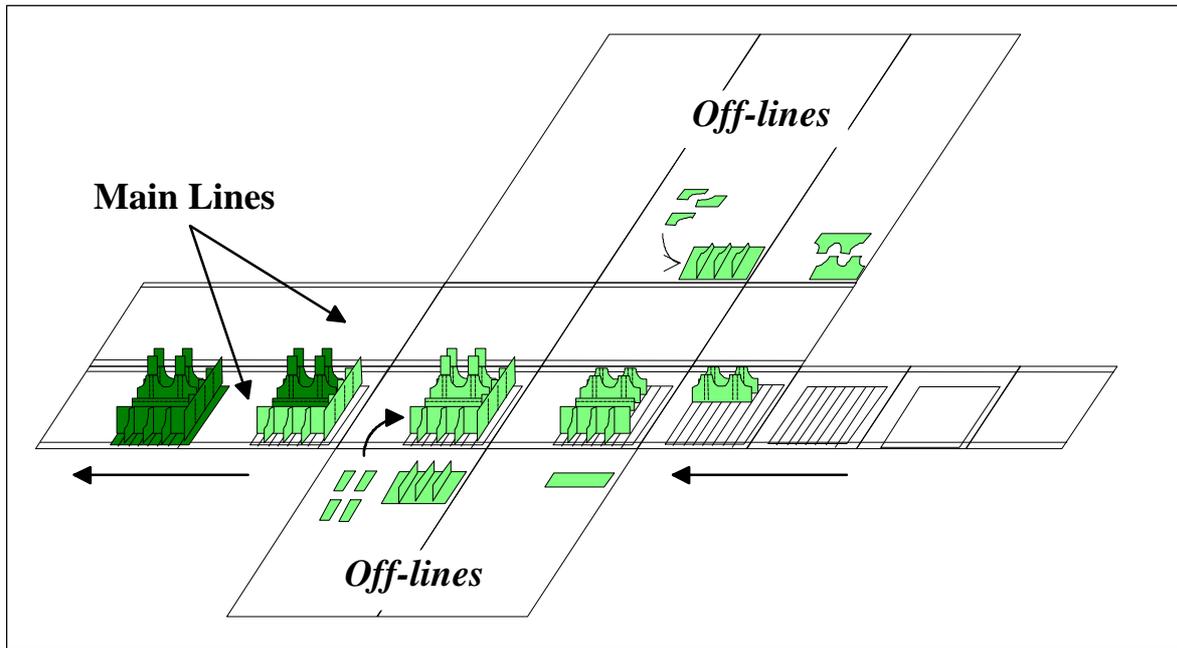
The Panelled Block Assembly Shop with Assembly Line and Off-lines.
